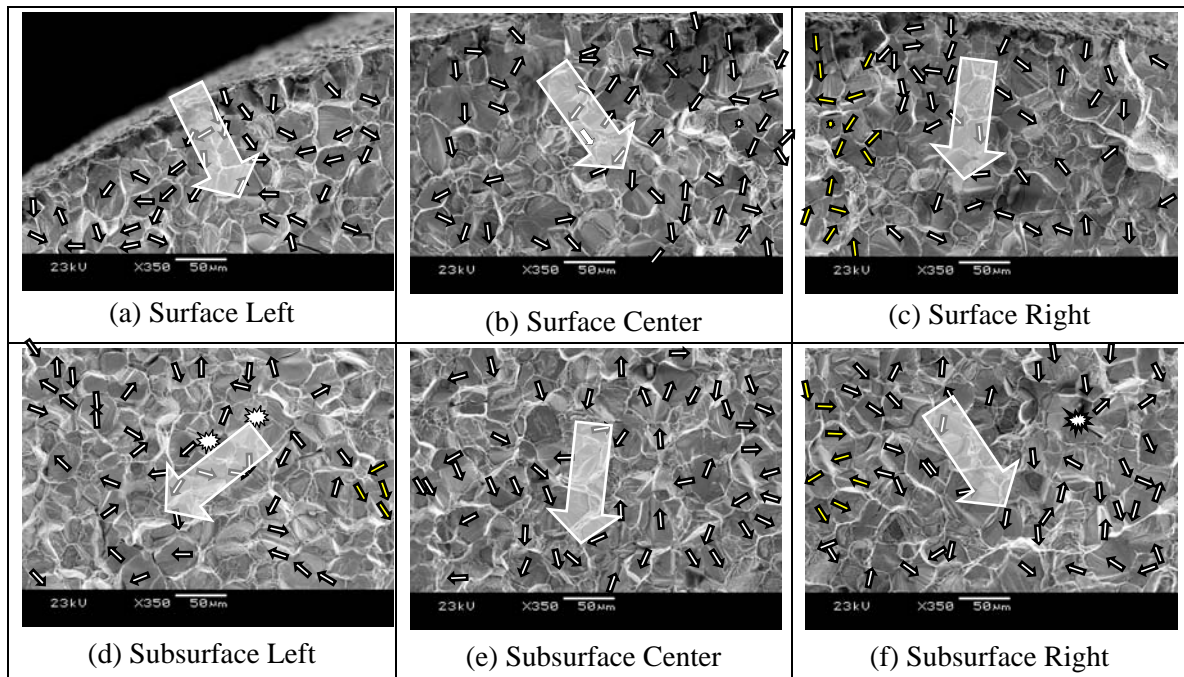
Composite Tensile Fracture Surface Images of an EDM WNiFe Room Temperature Drop Tower Specimen with Micro and Macro Directional Indicators
